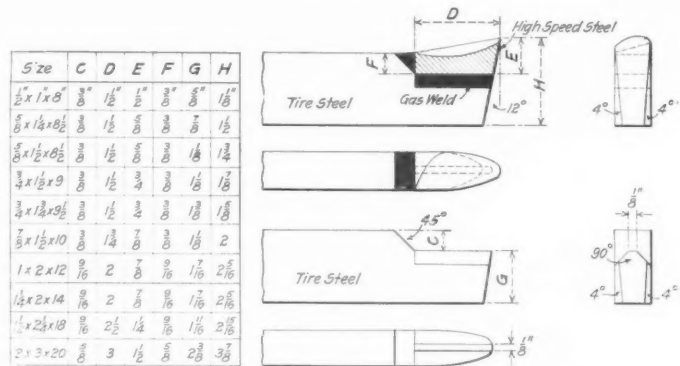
Method of Welding High Speed Steel Tips to Carbon Steel Tool Shanks
